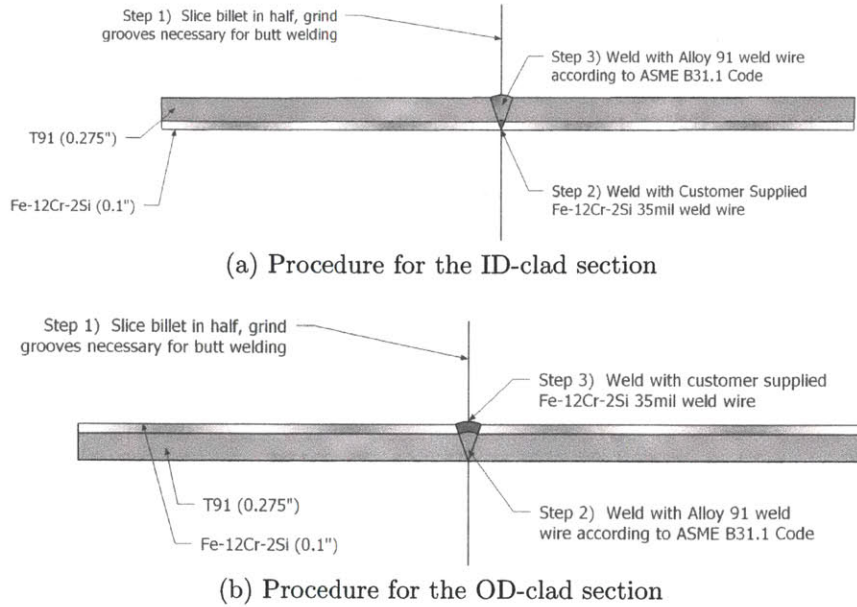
Welding procedure for samples in the ASME-certified welding study
